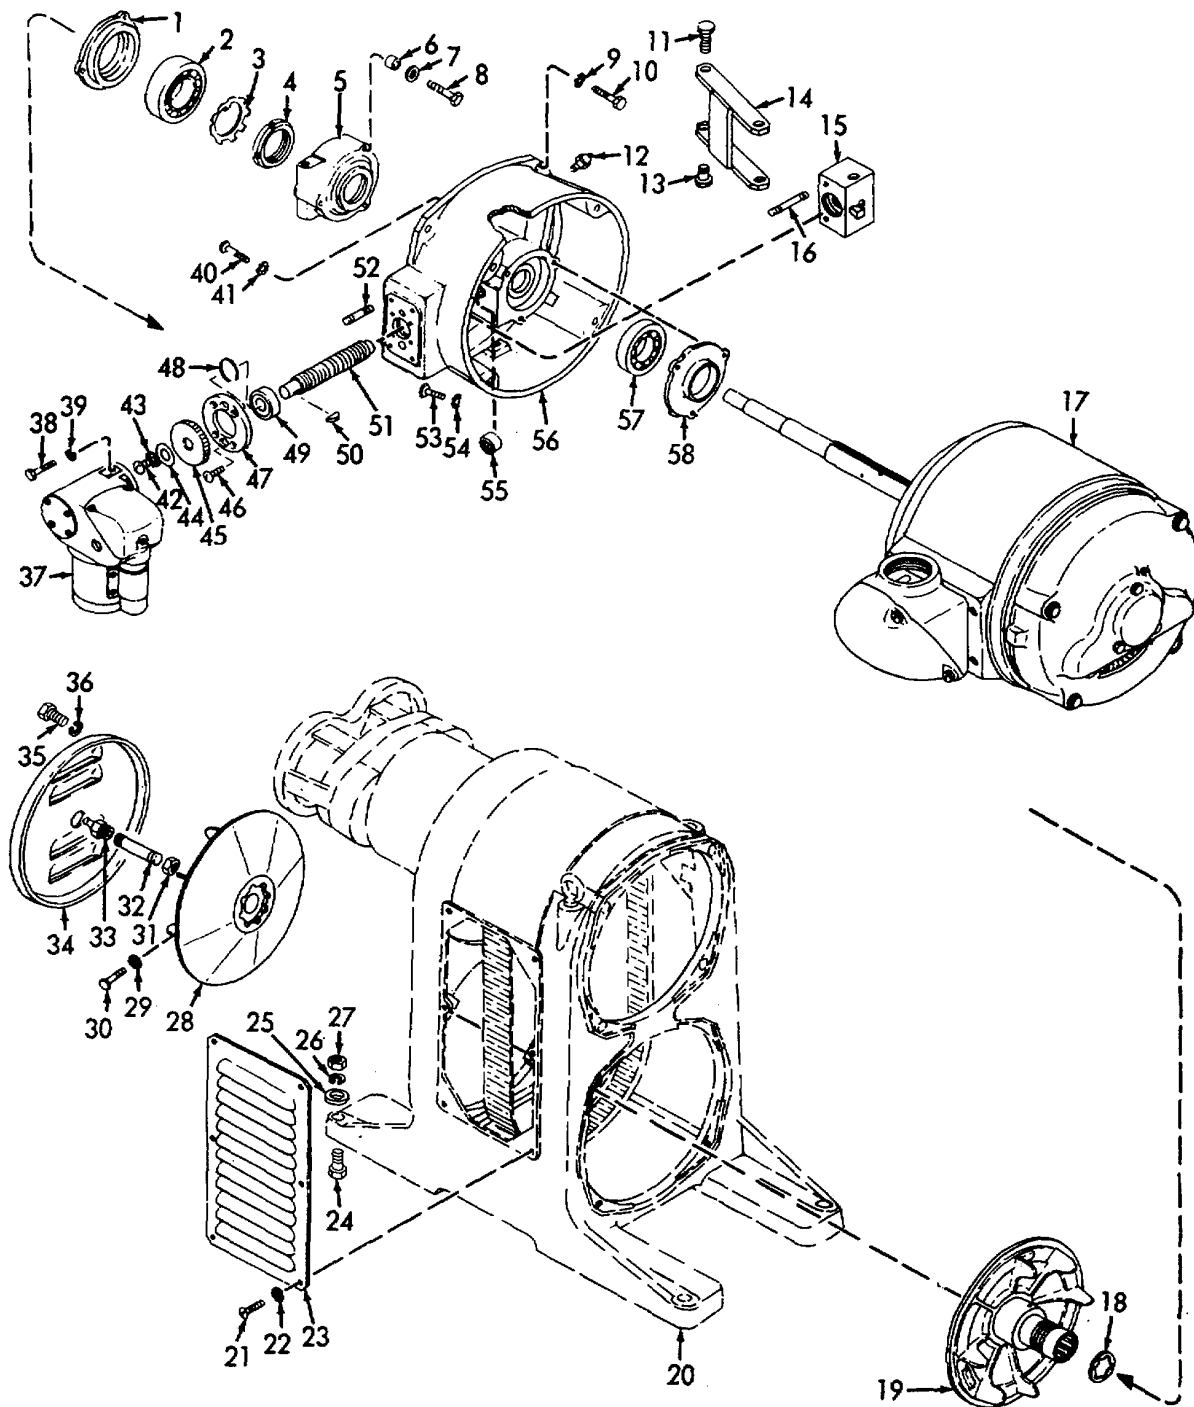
Adapter bracket, electric remote control, and varidrive motor partially exploded view.
